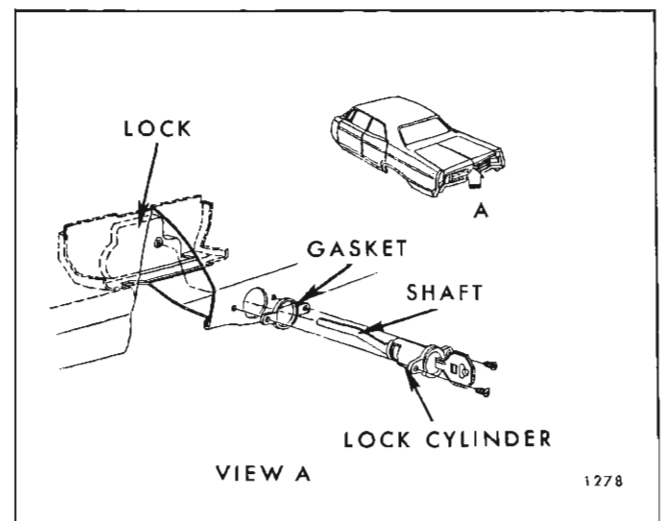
F12—Rear Compartment Lid Lock Cylinder Assembly
